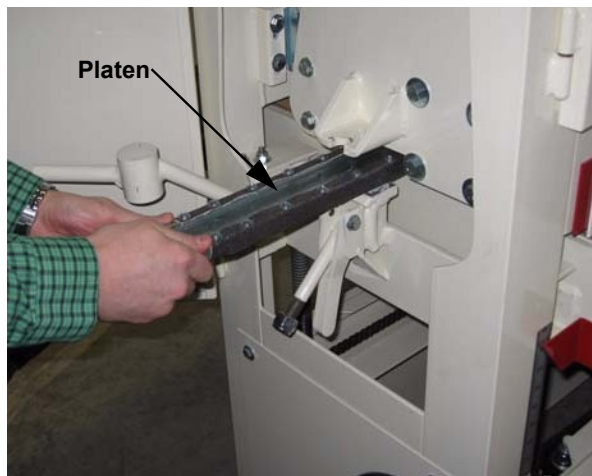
Remove Platen After Completing The Finish Sanding Step. 37"x 60" Only
